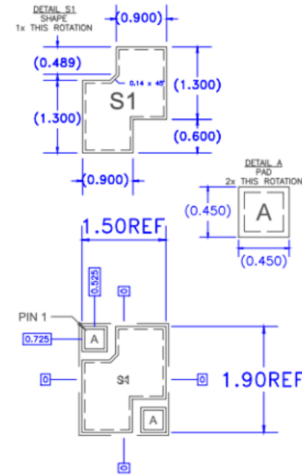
PCB Footprint Recommended Solder Mask Pattern
